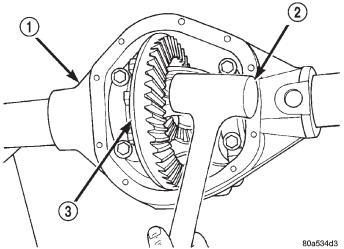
Seat Ring Gear Side Differential Dummy Side Bearing
